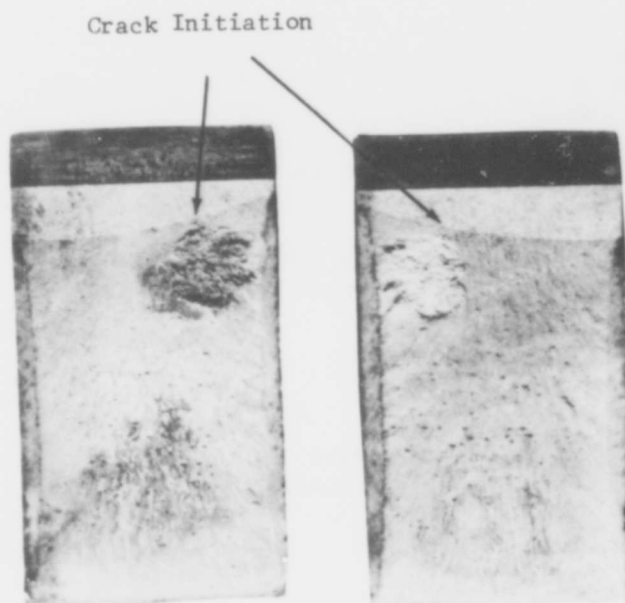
Fracture Surface of HP 9-4-45 Steel Notch Bend Specimens;
